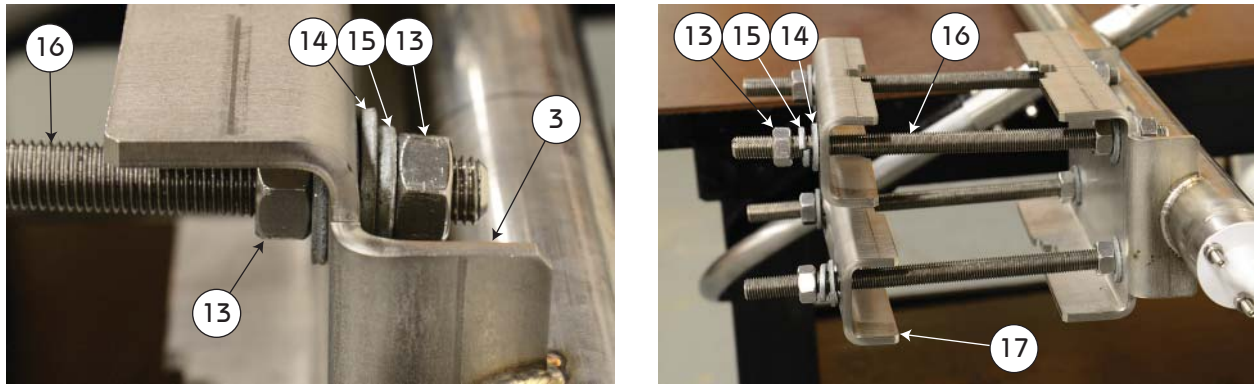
Attach threaded rods (16) securely to boom, then attach mounts (17) loosely to threaded rods
